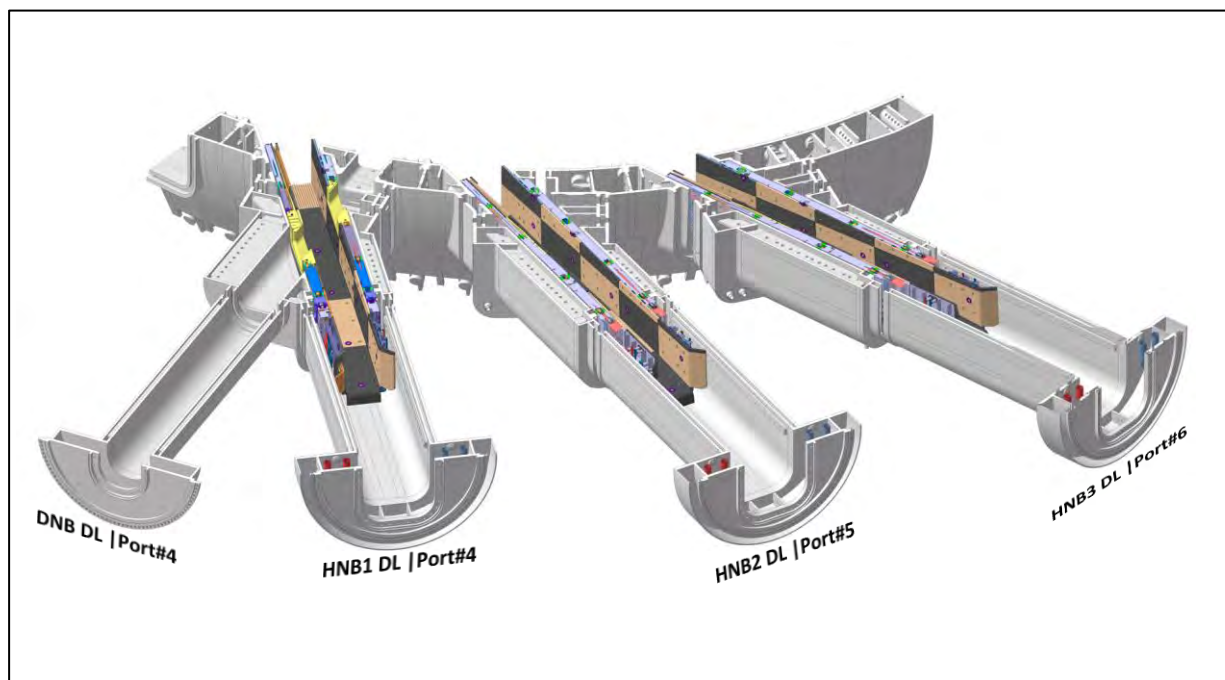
Cross section of HNB#1, HNB#2 and HNB 3 DL assemblies
